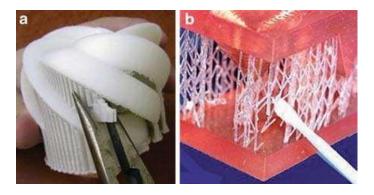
Breakaway support removal for (a) an FDM part (courtesy of Jim Flowers) and (b) an SLA part.
